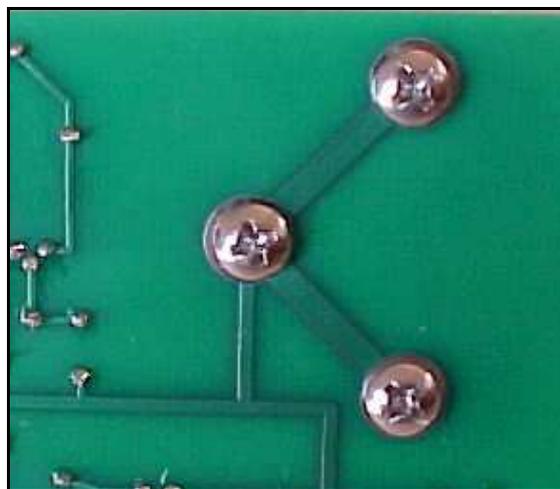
Attach the air variable capacitor to the board using the short screws. Do not use longer screws! The capacitor will be damaged.
